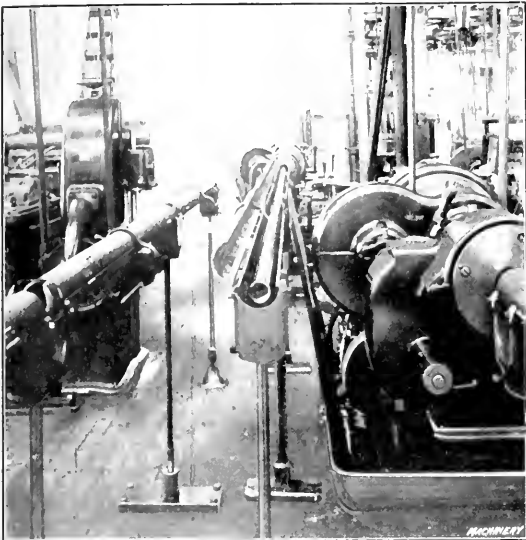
Bar Stock Guard for Turret Lathes with the Pipe Open
